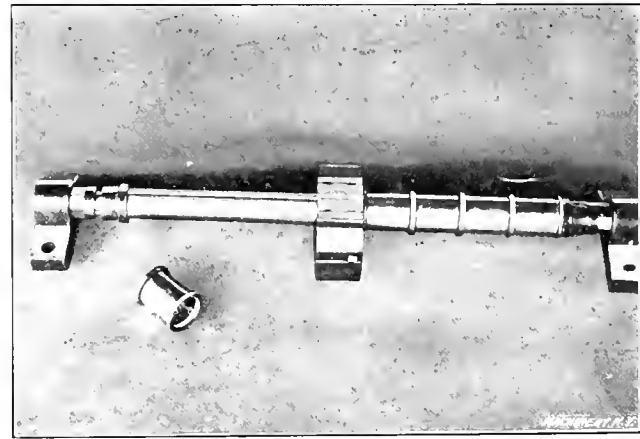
Mandrel used when splitting Connecting-rod Bushings
